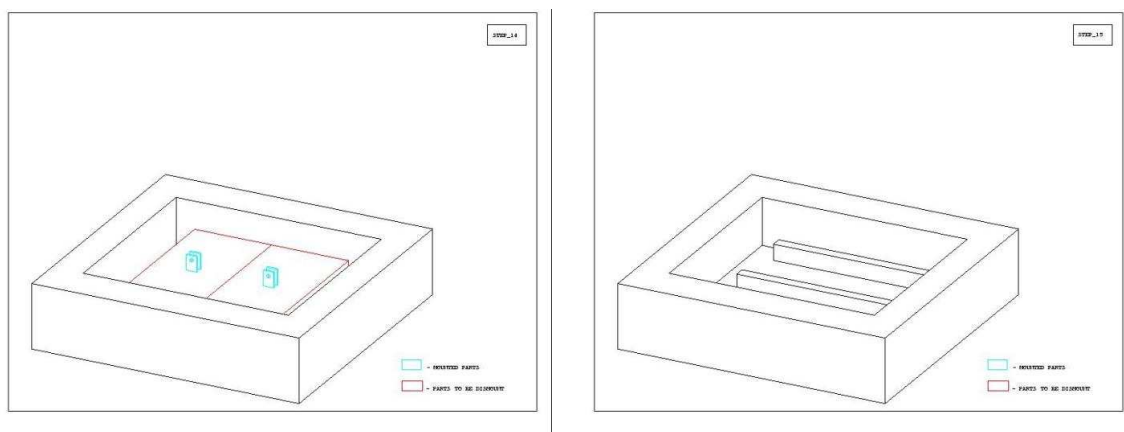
SM3 Analysis Magnet Assembly Steps 15 (left) and 16 (right)
